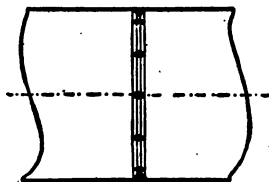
Method of tacking sheet sections before welding.
